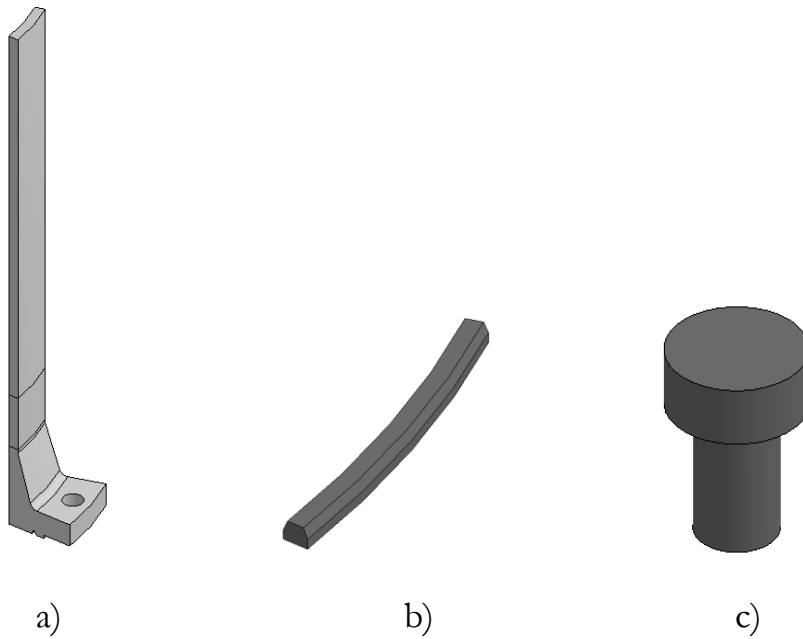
Components of the sector a) flange and pipe section b) gasket c) bolt
